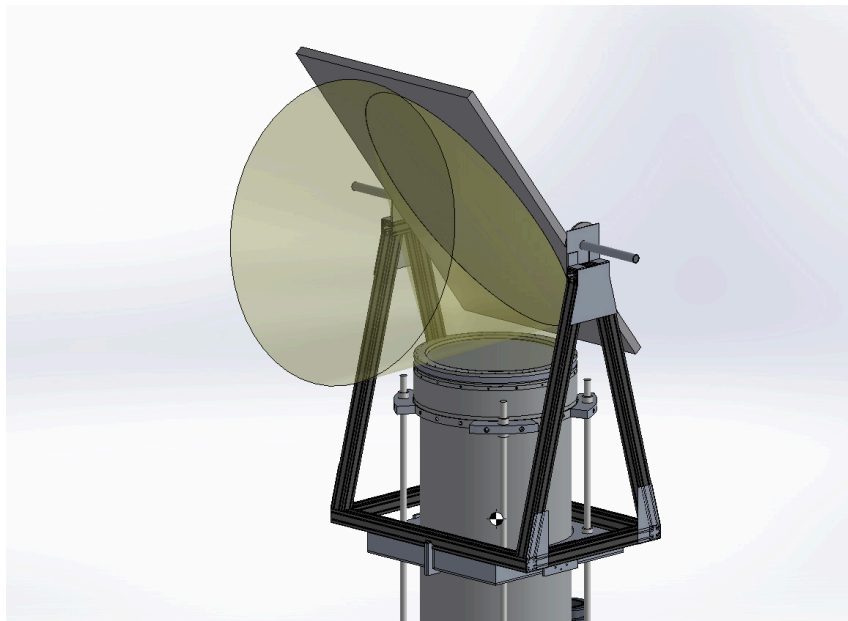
CAD drawing of the structure that holds the mirror above the cryostat.
